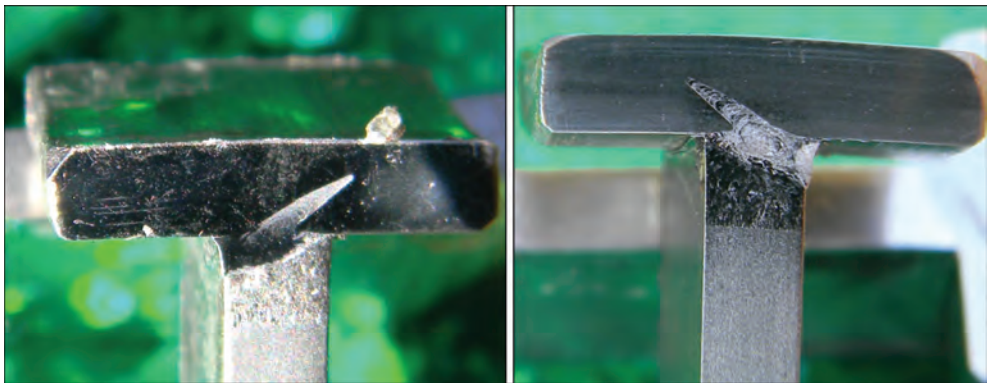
Sections of place of joining niobium with titanium by electron beam welding
